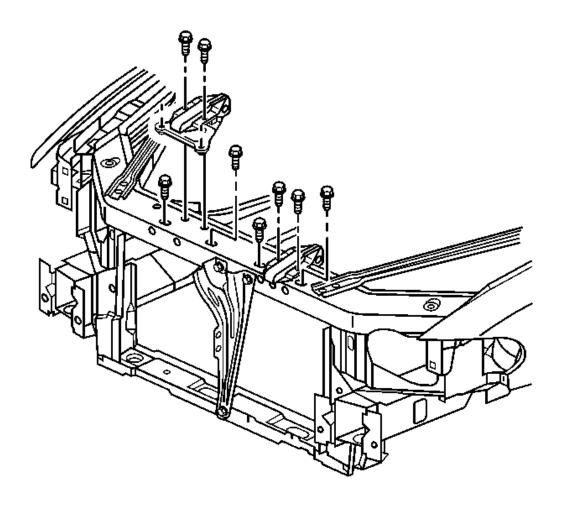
Engine Mount Strut Bracket & Upper Radiator Support Courtesy of GENERAL MOTORS CORP.
